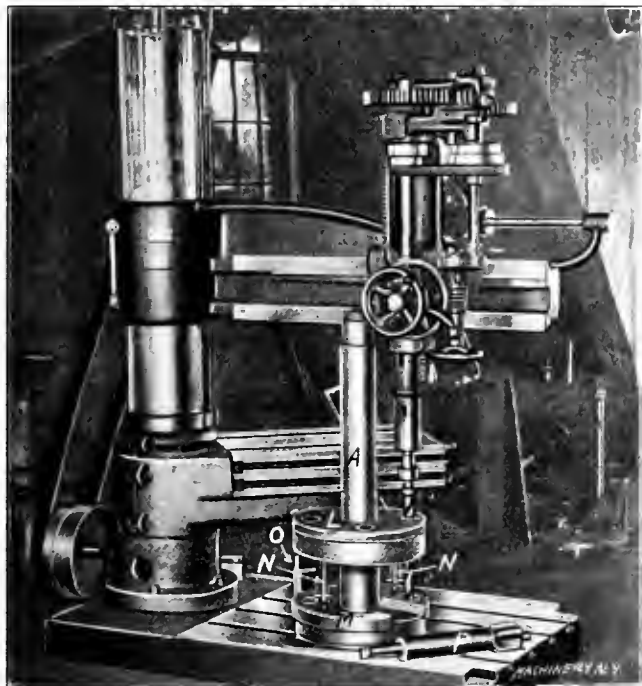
Roughing Out the Spindle Holes in the Radial Drill by Drilling and Counterboring.
